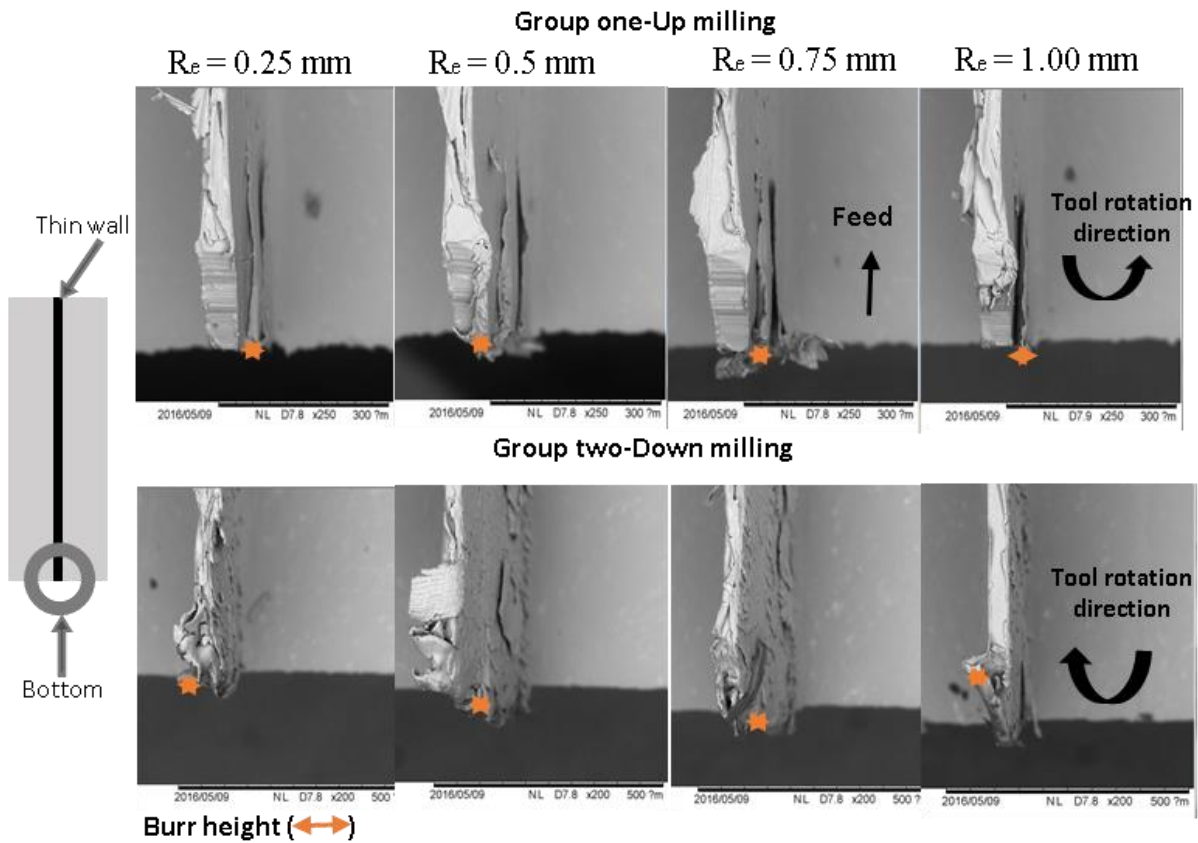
Top view of thin walls machined using up and down milling technology at the tool entry position
